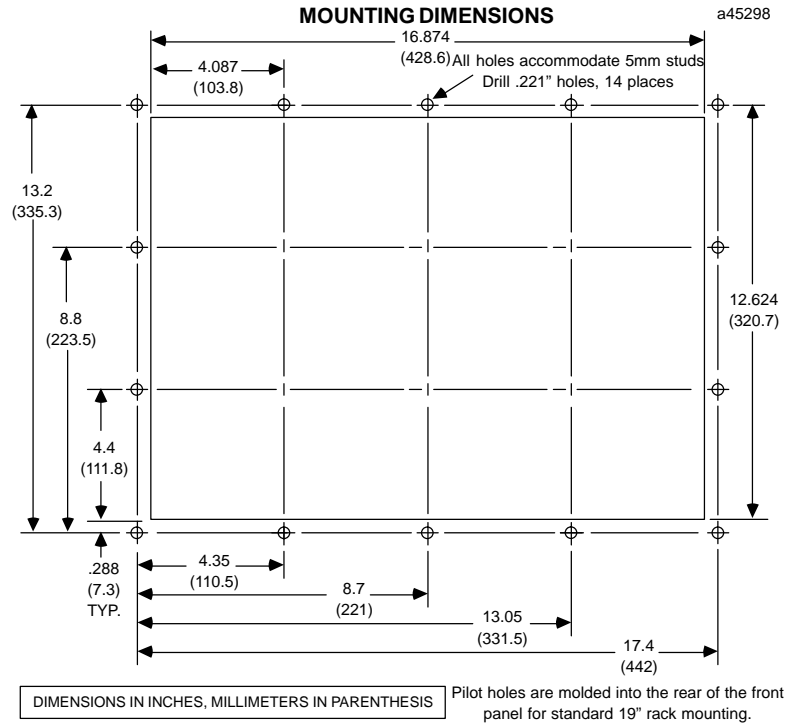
Cutout Drawing for OIT Models IC600KD542
